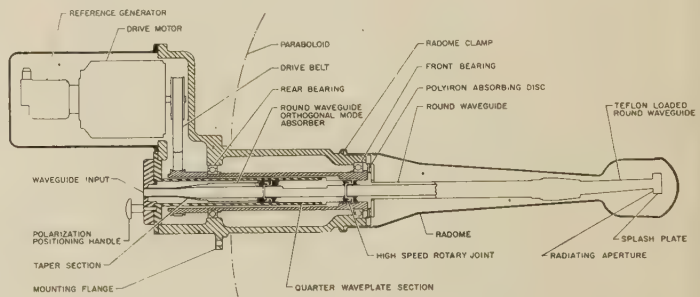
Cutaway drawing of the complete unit and paraboloid.
